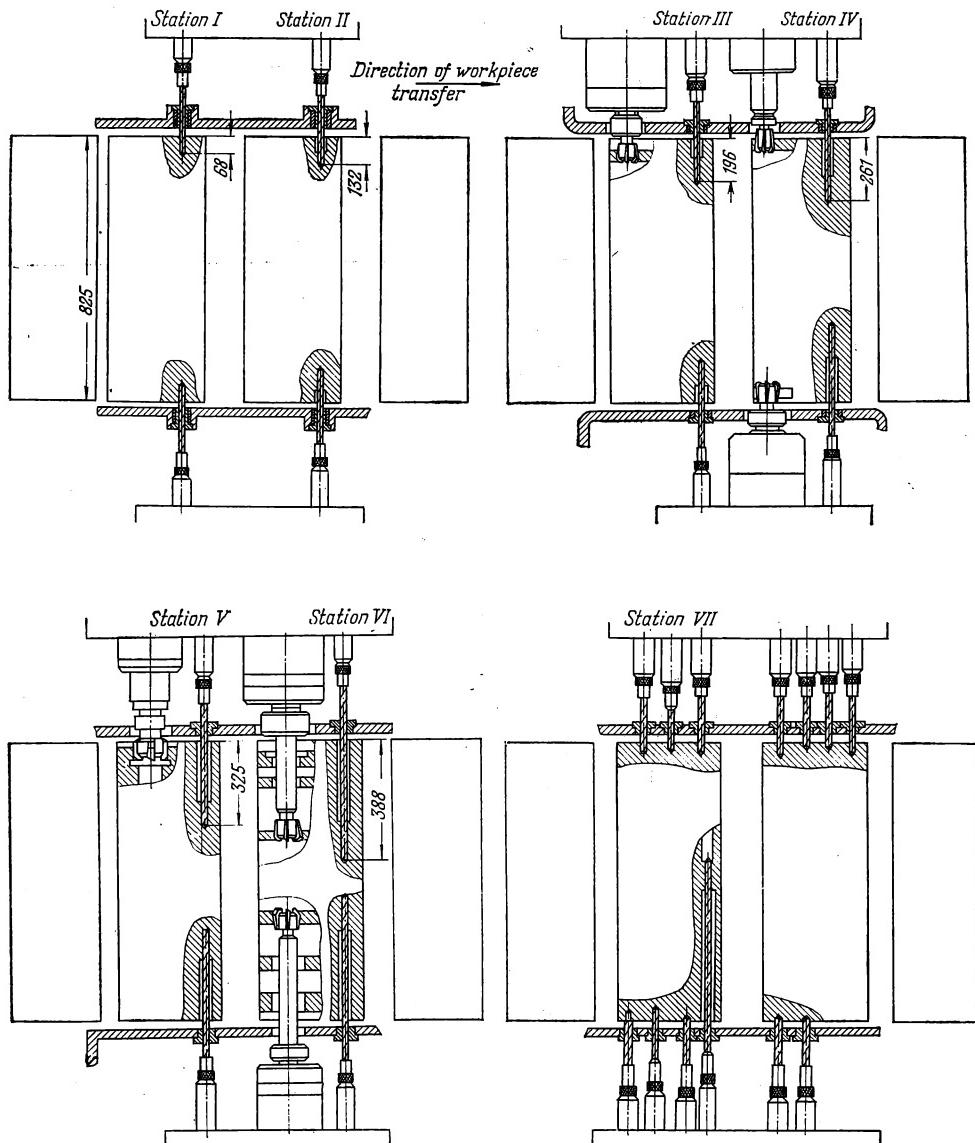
Sequence of operations for machining holes in the end faces of automobile engine cylinder blocks
